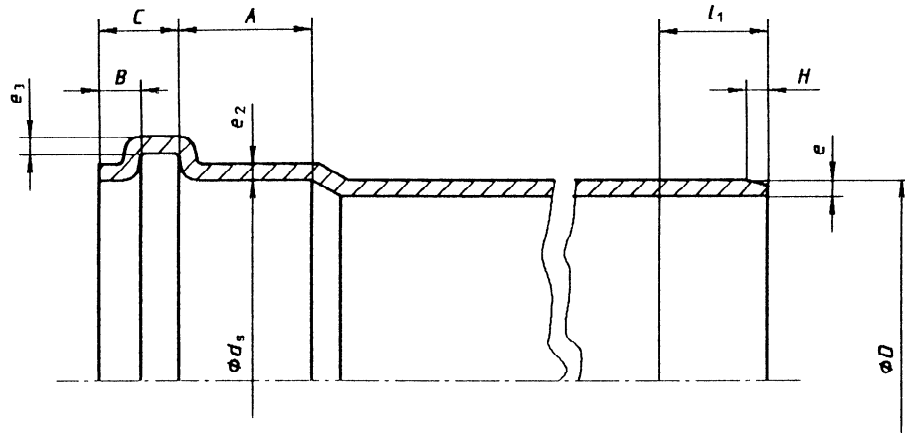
Basic dimensions of single sockets and spigot ends for elastomeric sealing ring joints
